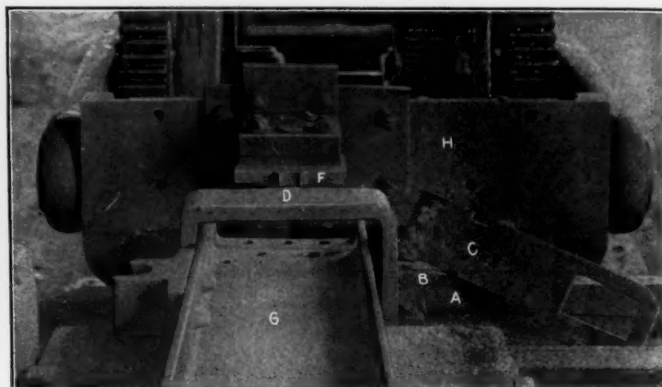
Bulldozer Equipped for Shearing Rivets from Truck Transoms
